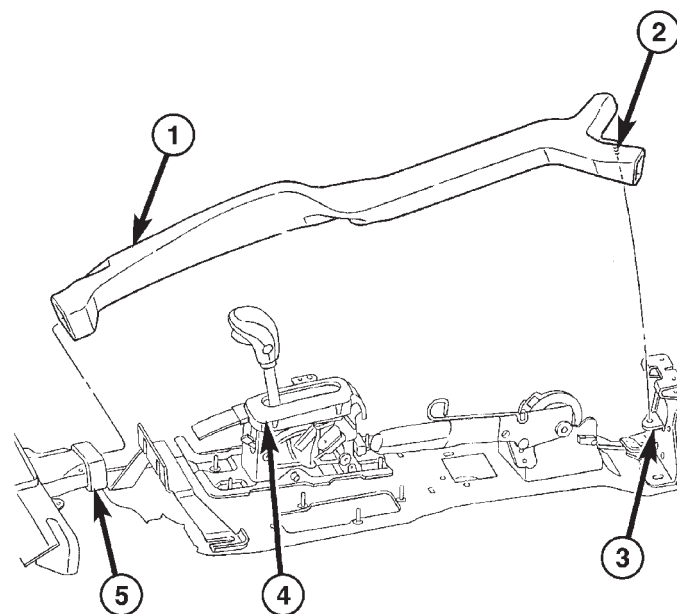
CONSOLE DUCT REMOVE/INSTALL
